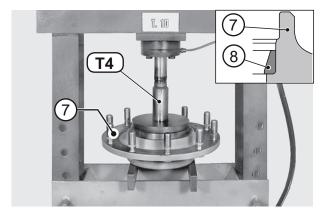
Turn the hub over (7), lubricate bearing seat and, using tool T4 (See drawing T4 p. 28) install the bearing thrust block (8).
